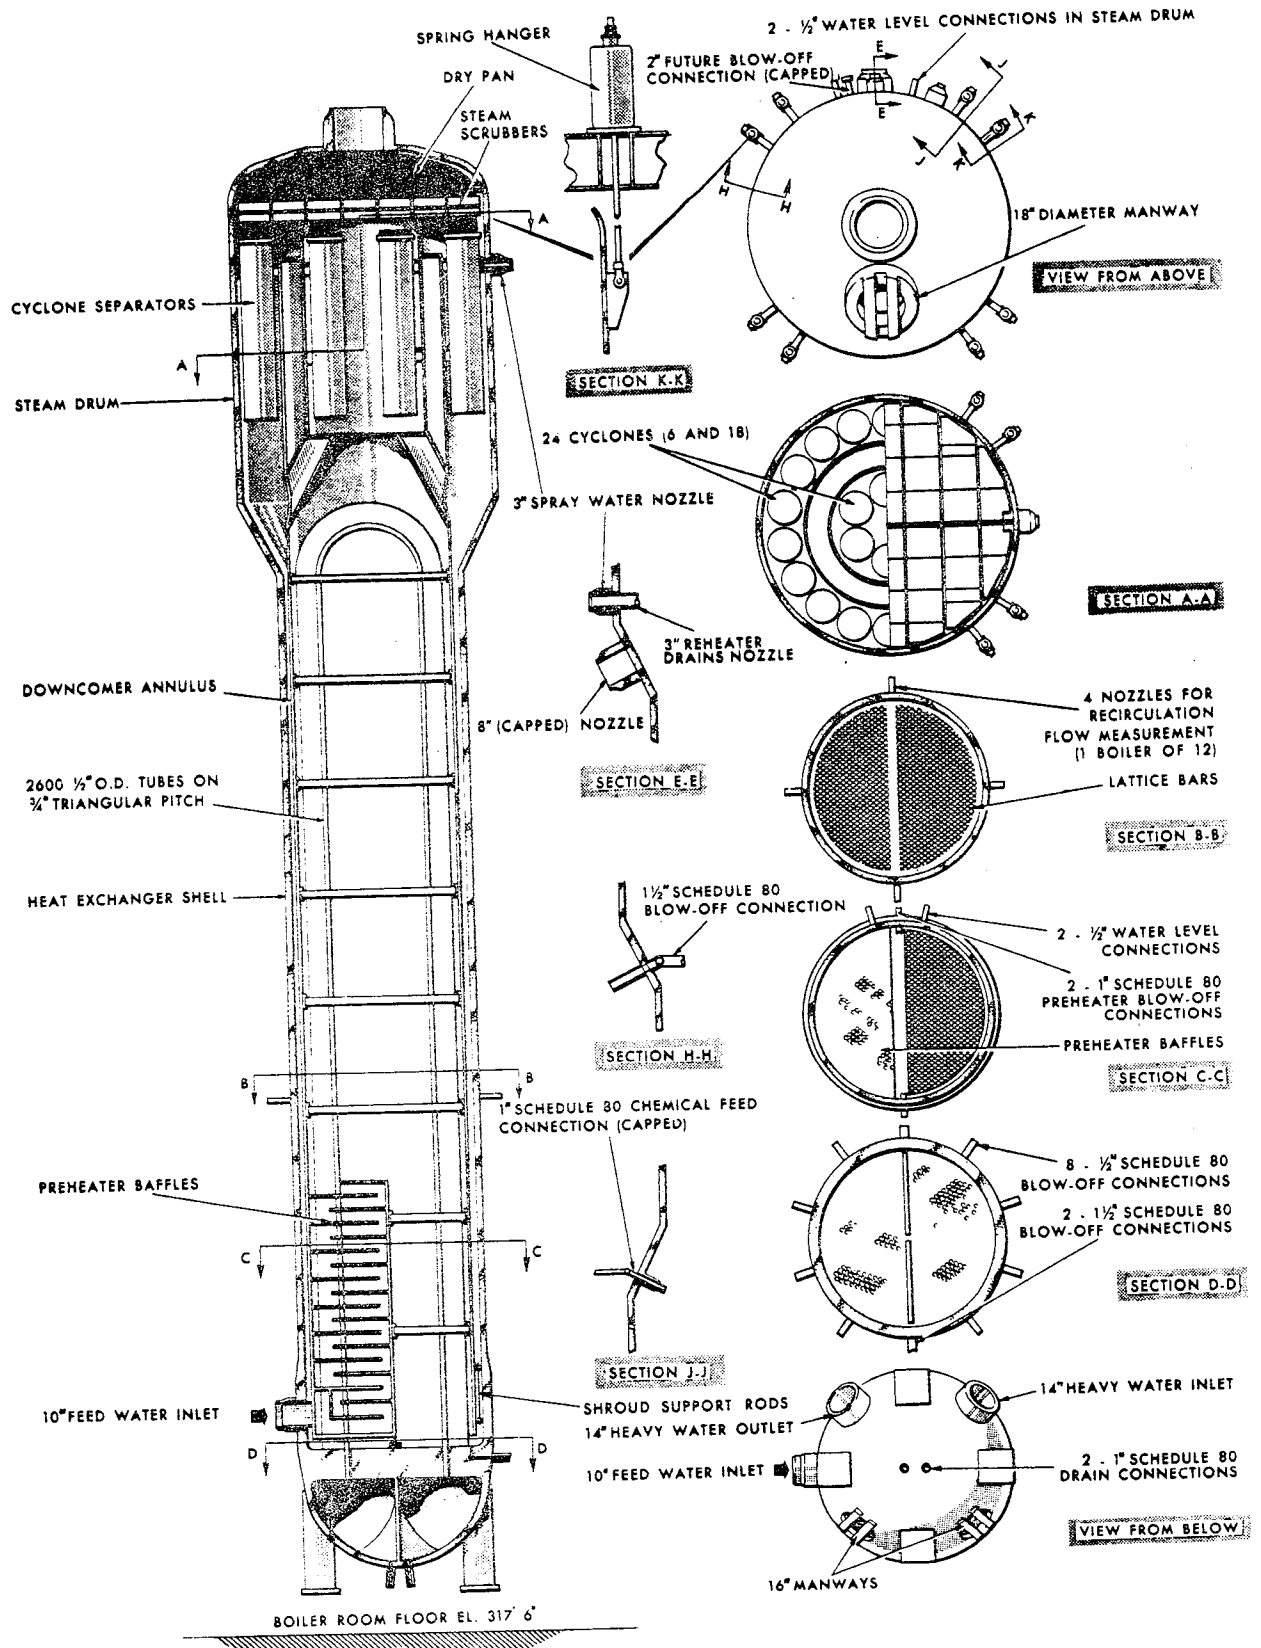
PICKERING 'A' STEAM GENERATOR SECTION
